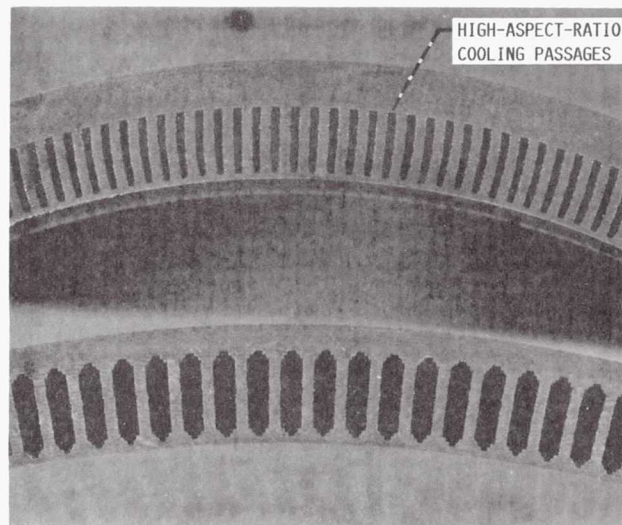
PLATELET-FORMED COMBUSTION CHAMBER LINER SEGMENTS.
